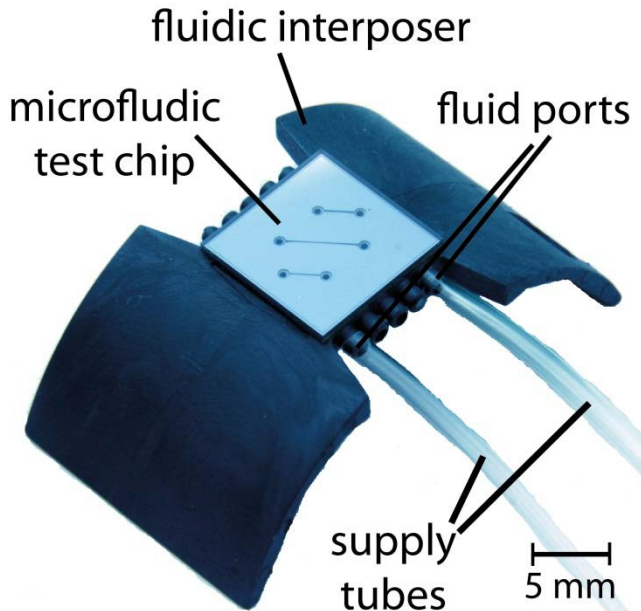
Assembled fluidic system. The microfluidic test chip is mounted to the fluidic interposer by a flip-chip solder process.
